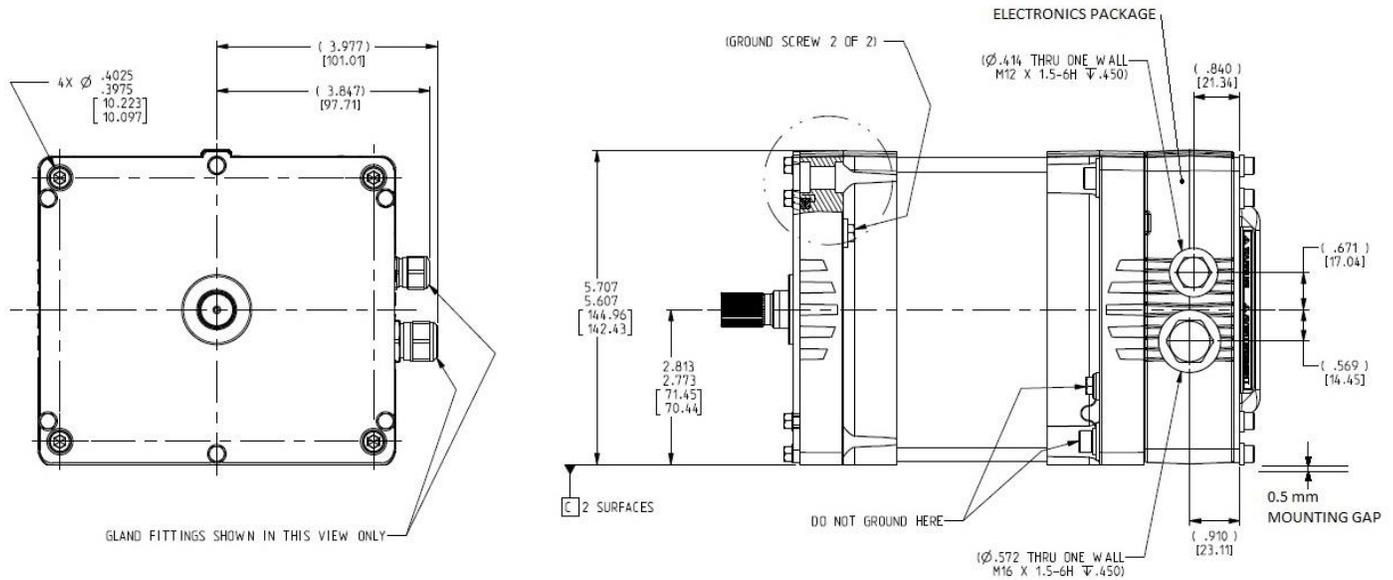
ProAct Gen3 FLEX Actuator Mounting Views with Mounting Gap
